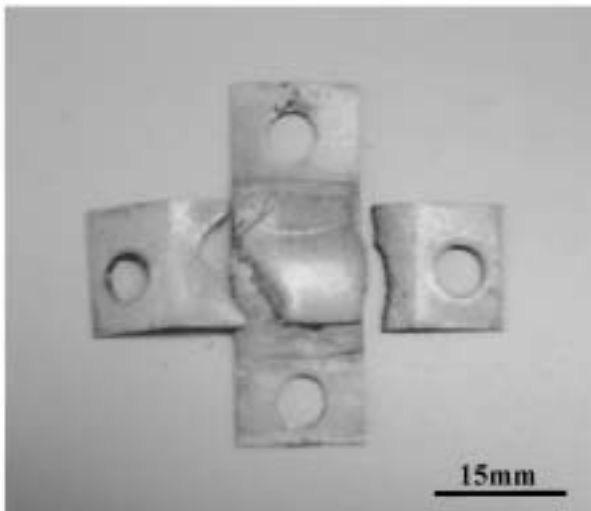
Appearance of the joint broken at the base metal after tensile test.
